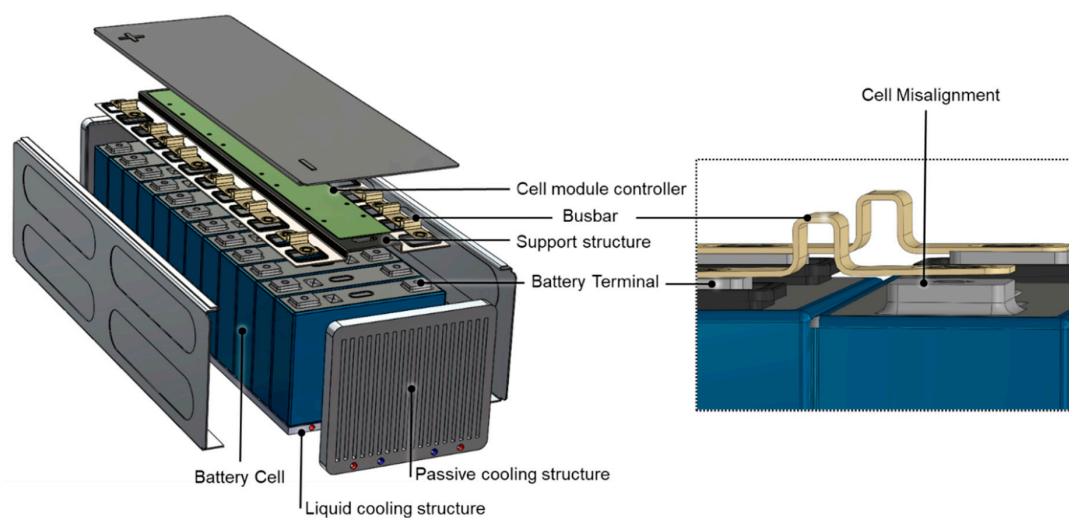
(left) Schematic representation of automotive battery module in assembly; (right) Detailed view of busbar-electrode interface to be measured on-line prior to welding.
